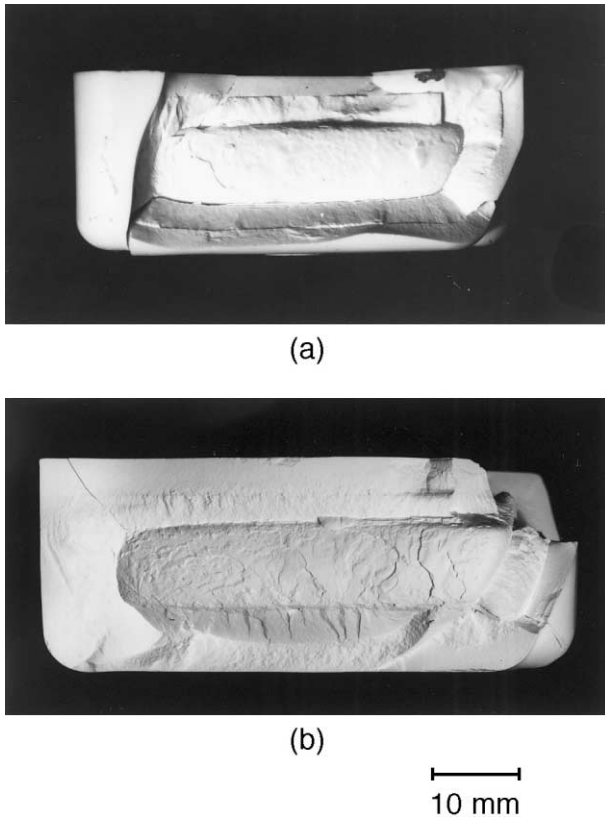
Insulated sprue mouldings (25 mm thick): (a) fractured after sintering; (b) fractured after binder removal.
